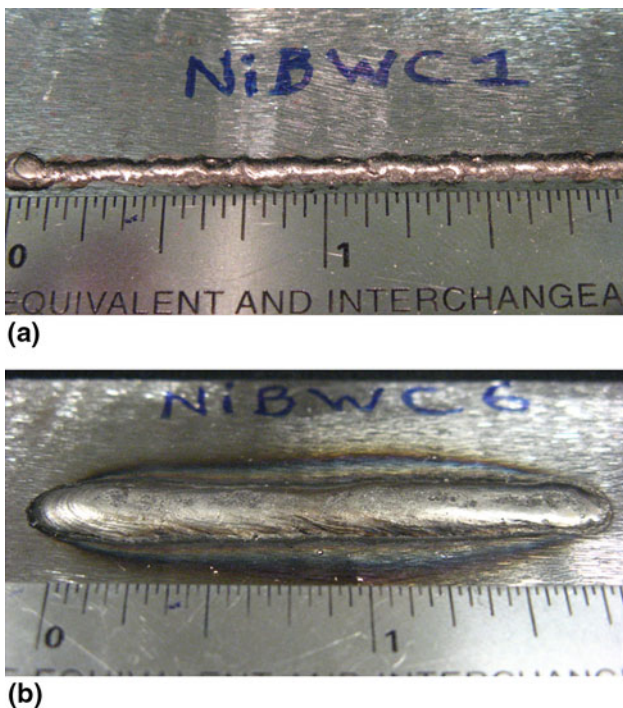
Beads produced with the CSC-MIG welding system using (a) low heat input parameters—sample A and (b) high heat input parameters—sample F
